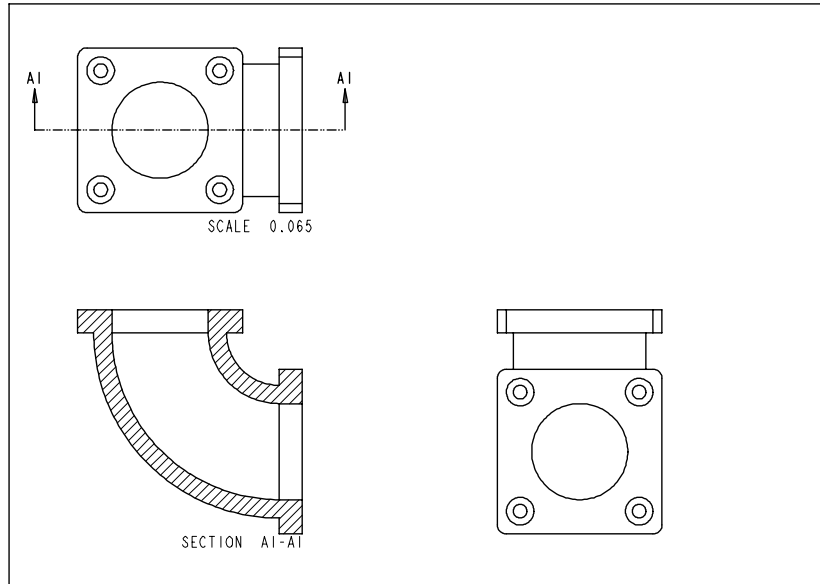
Drawing sheet after generating the top view and the sectioned front view with the display of datum planes
